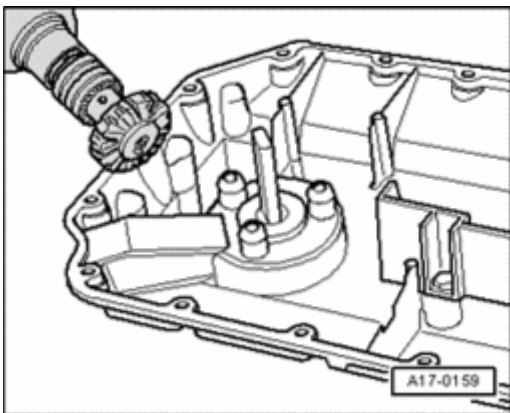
Using Rotating Plastic Brush To Remove Any Remaining Sealant From Oil Pan (Lower Part) And At Upper Part
